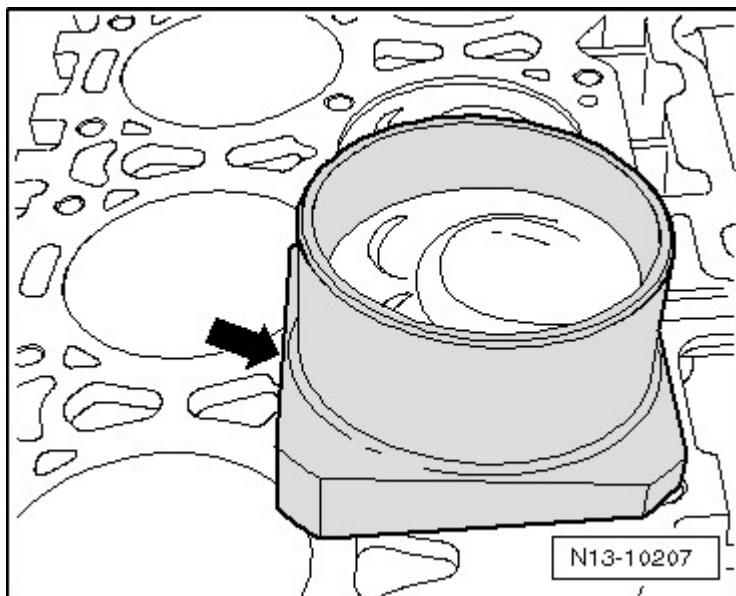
Placing Funnel Securely On Cylinder Block And Slide Piston Completely Into Cylinder Bore
